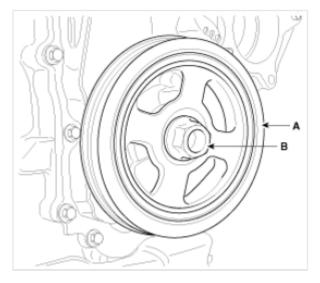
Identifying Crankshaft Pulley And Bolt Courtesy of HYUNDAI MOTOR AMERICA
